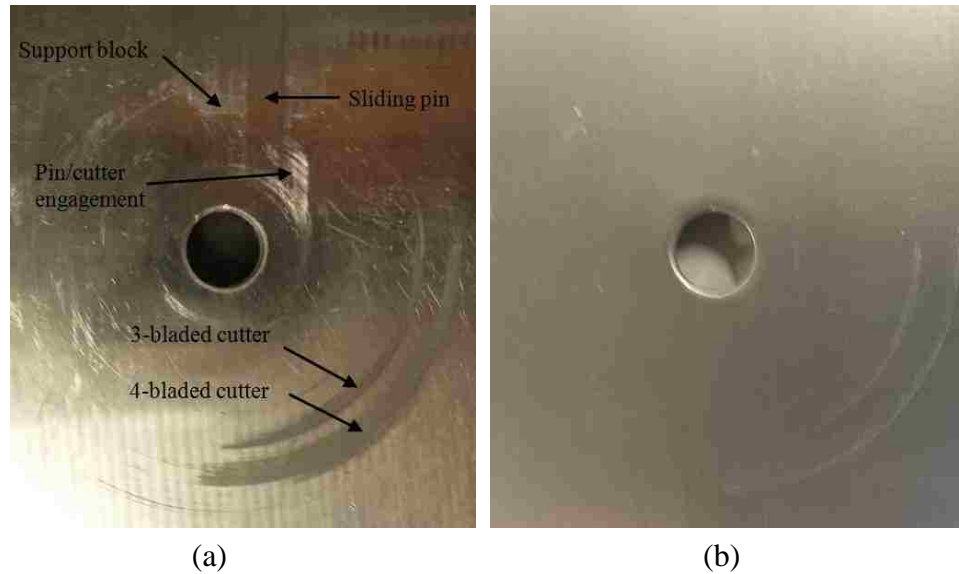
Surface condition of aluminum plate. (a) After approximately 100 tests with 3-bladed cutter and 100 tests with 4-bladed cutter. (b) After manual sanding and polishing.
